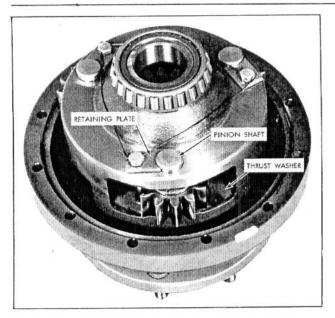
Axle Planetary Assembly - Narrow Ring Gear
